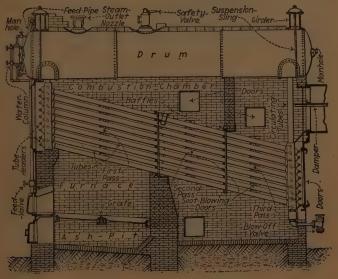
Babcock & Wilcox boiler with cast iron headers.
